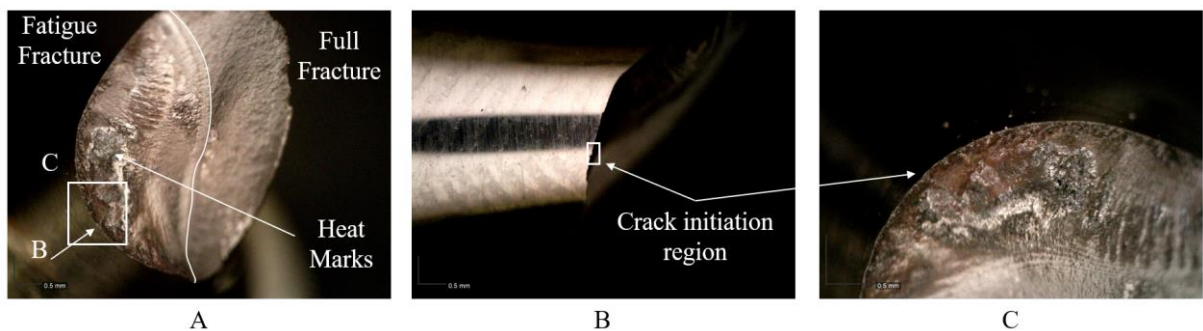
AISI P20 pure torsion specimen 3: (A) fatigue and full fracture surface: (B) Crack initiation angle; (C) fatigue fracture surface crack initiation region.
